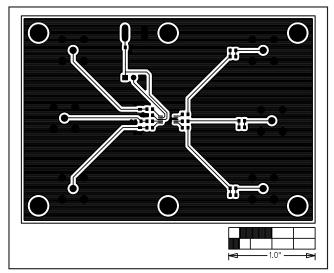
MAX9653 EV Kit PCB Layout—Component Side
